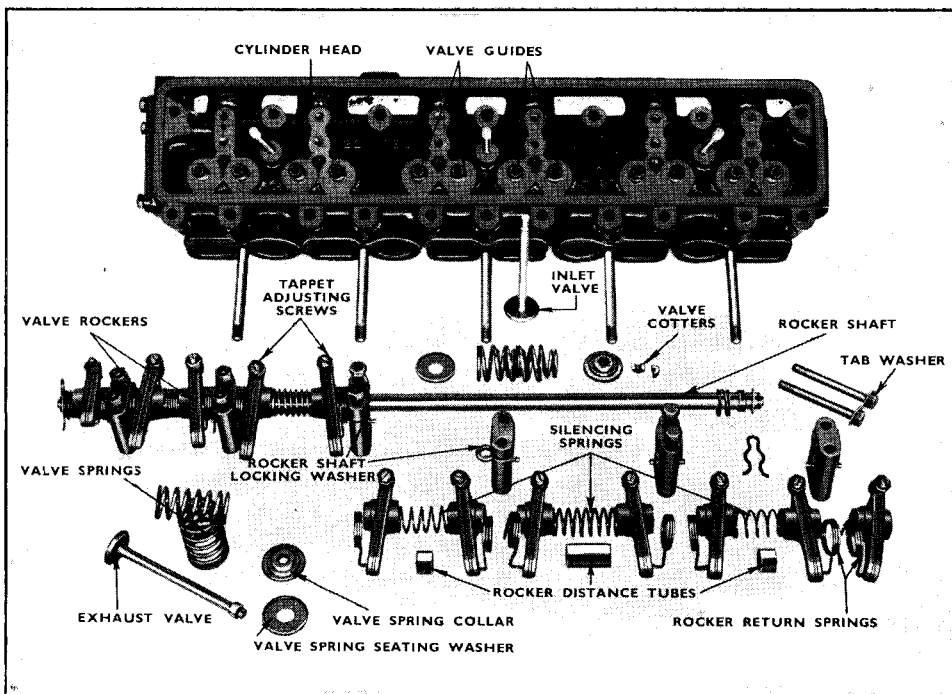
Illustration No. 22.—Showing the relative positions of all the parts contained in the rocker gear.
